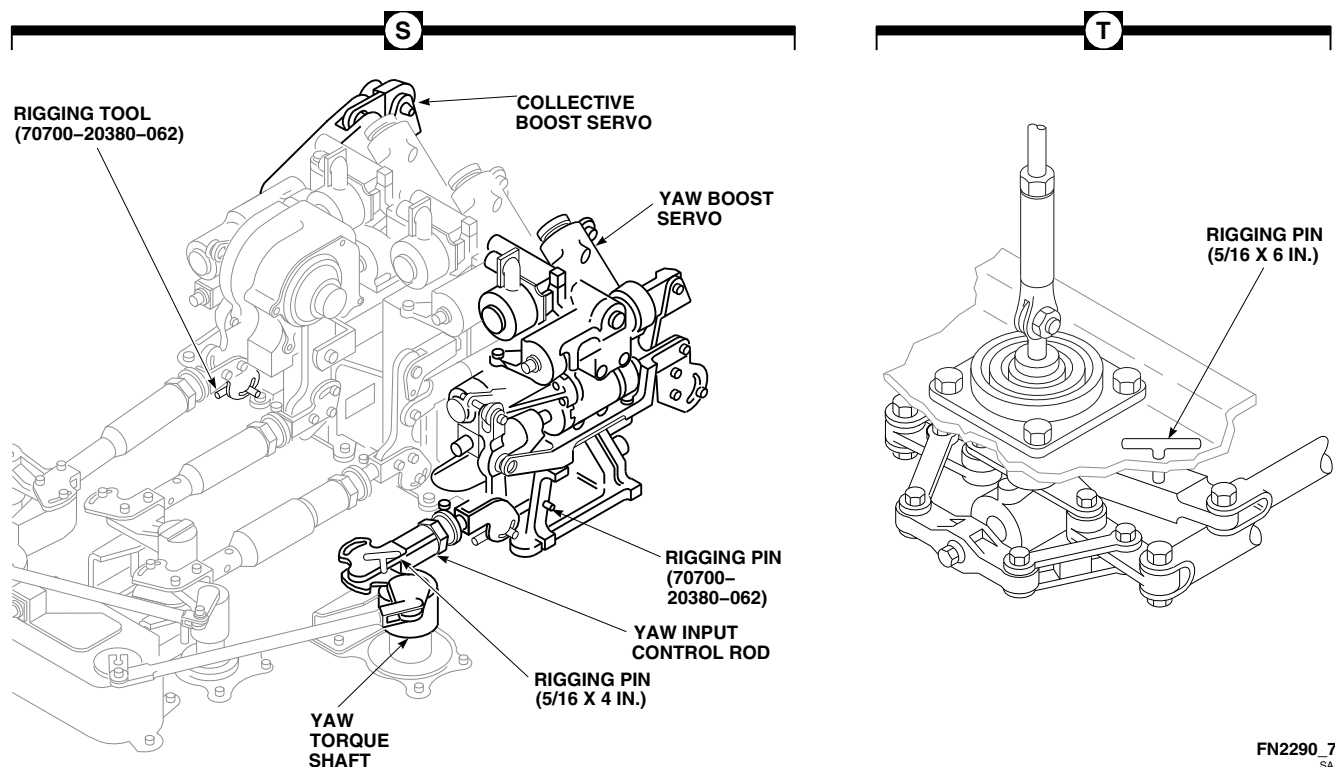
TAIL ROTOR SYSTEM COMPLETE RIG (SHEET 7 OF 7)
